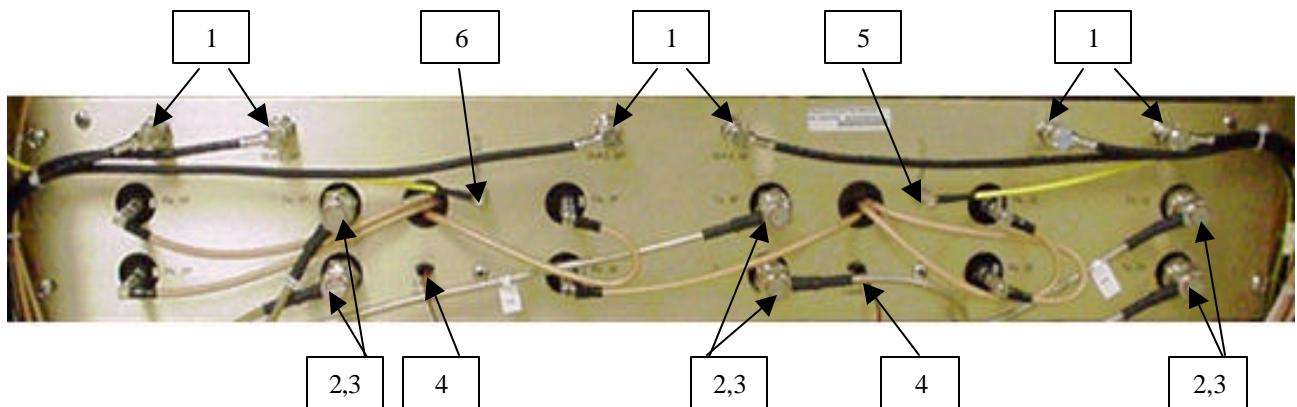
Remote Interface Tray (G2) Assembly Front Panel
